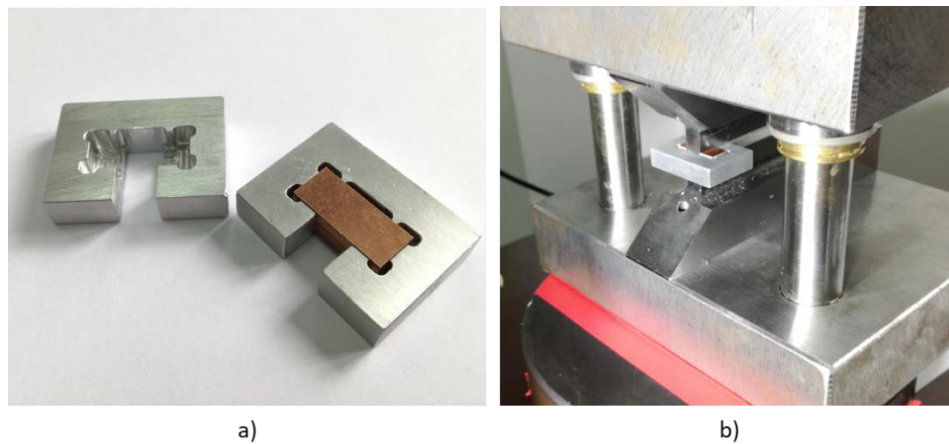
a) Compression tools slipping a side b) design of a guiding tool to prevent slipping movement
